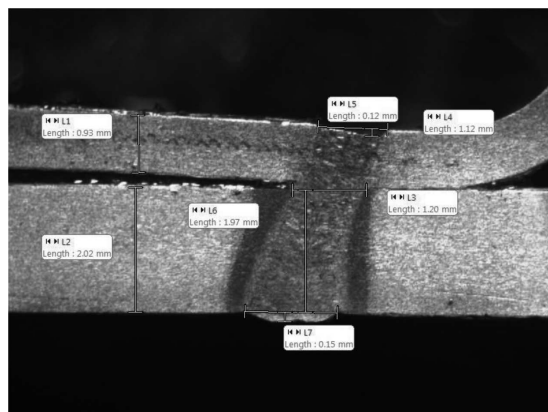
Position of welded sheet thickness: upper is 1 mm, lower 2 mm
